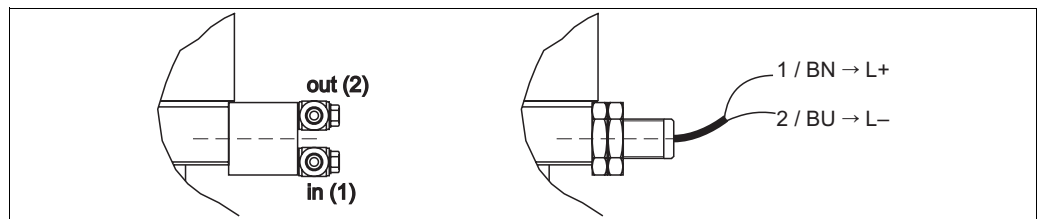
Limit position switches, left: pneumatic (1 = compressed air inlet, 2 = compressed air outlet) right: electric (NAMUR)
